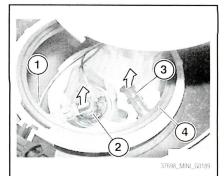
Secure cable (1) and lines (2 and 3) with cord and replace rubber seal (4)
